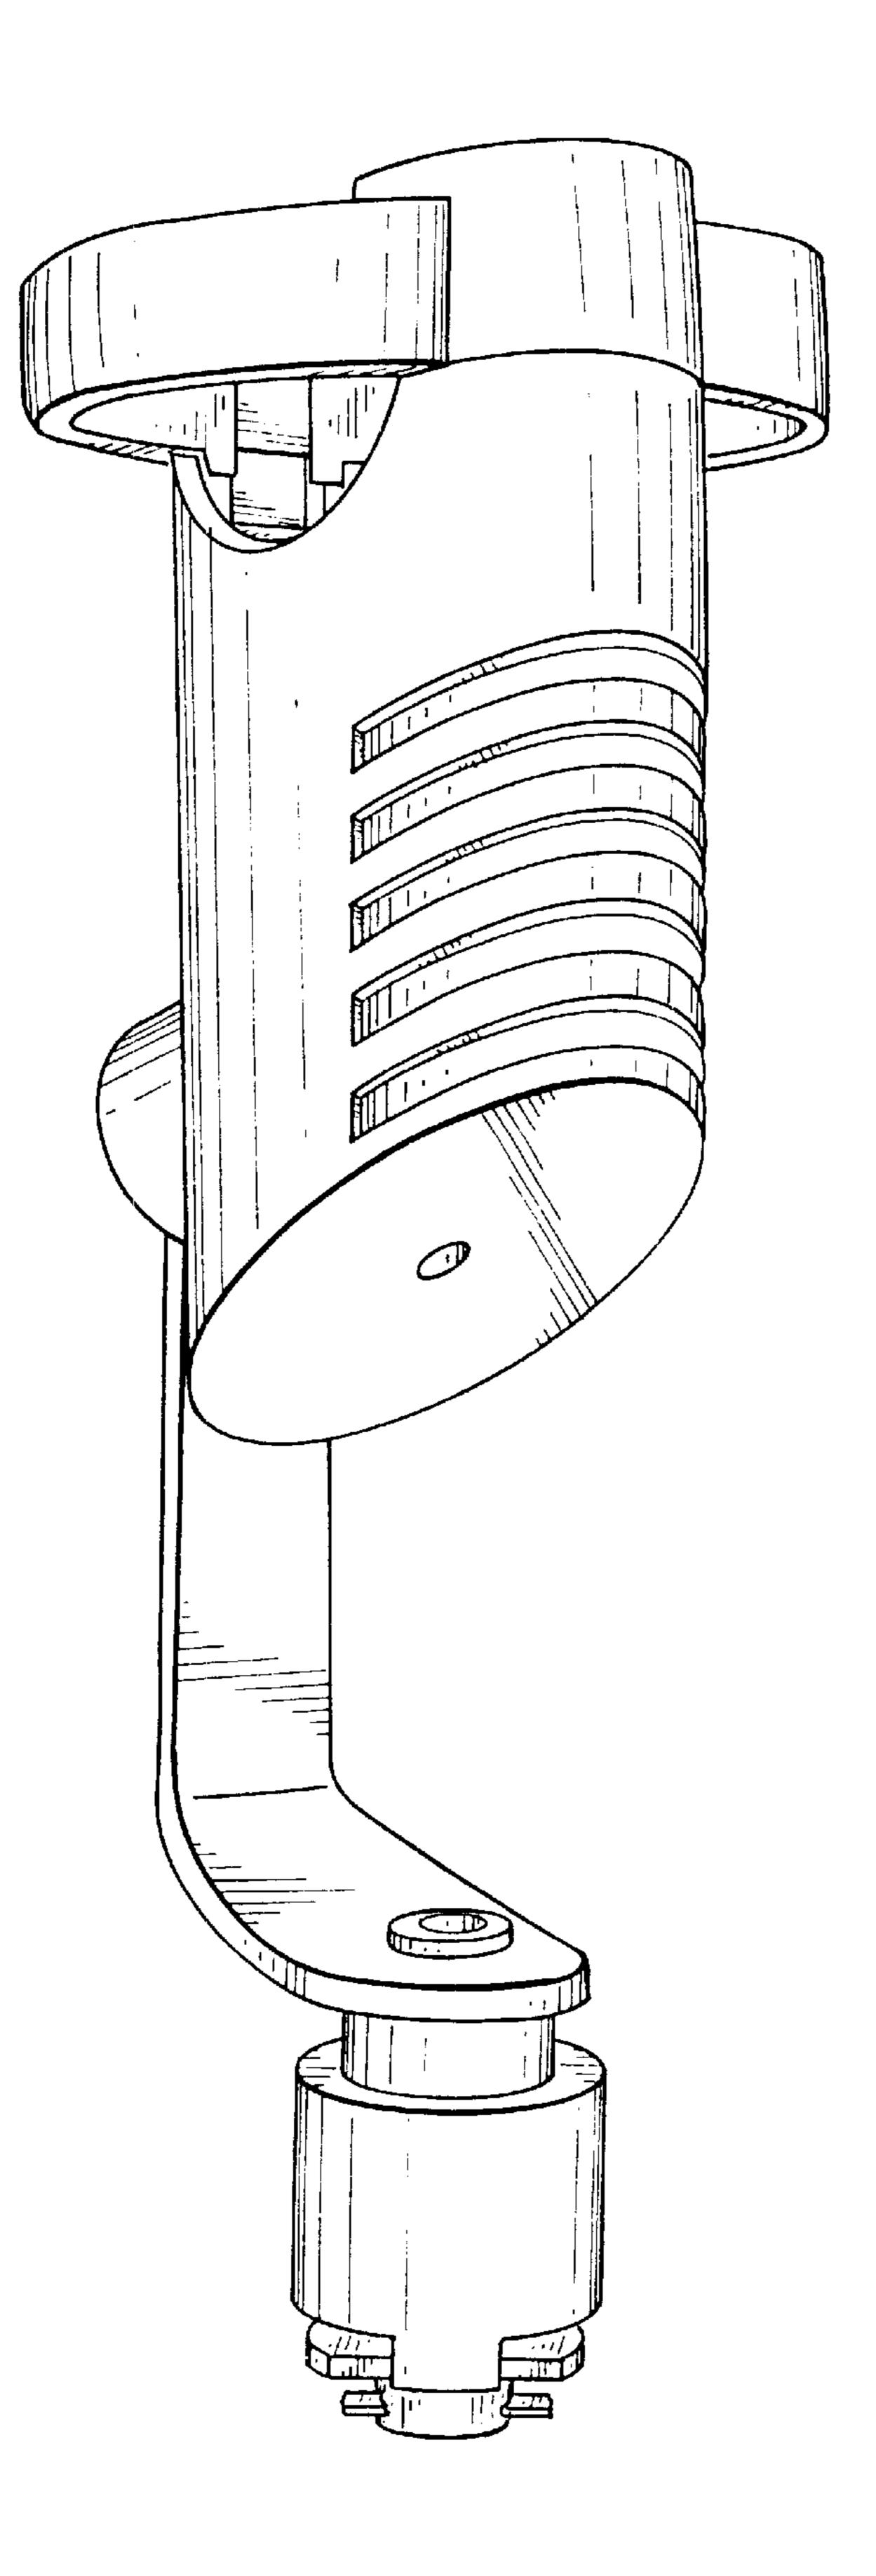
is a rear plan view of the fixture of FIG. 1 rotated to a front-facing position.
